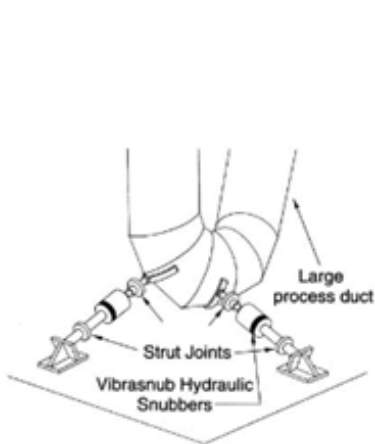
This illustrates a typical use for “VIBRASNUB” Hydraulic Snubbers in a two-plane assembly on a large U-bend in a modern refinery. The snubbers allow slow expansion movements to occur but dampen out shock and vibratory movements.
